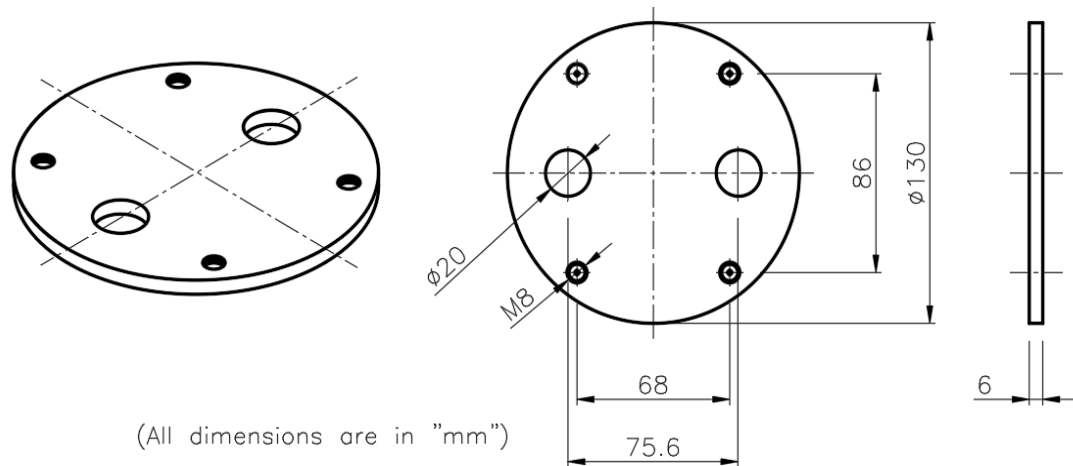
Schematic sketch of the backup plate used to support FSW plates
